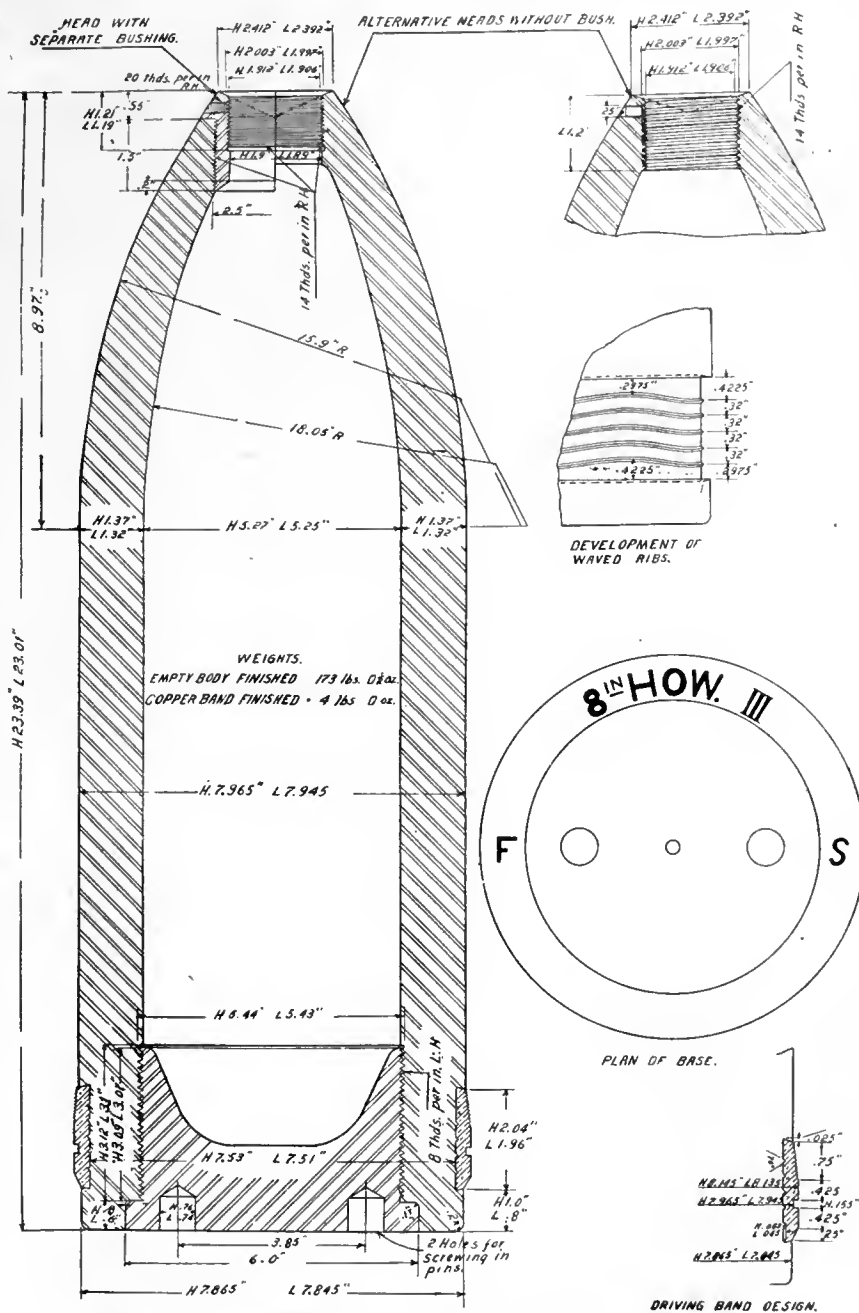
AN 8-INCH HIGH-EXPLOSIVE SHELL.
